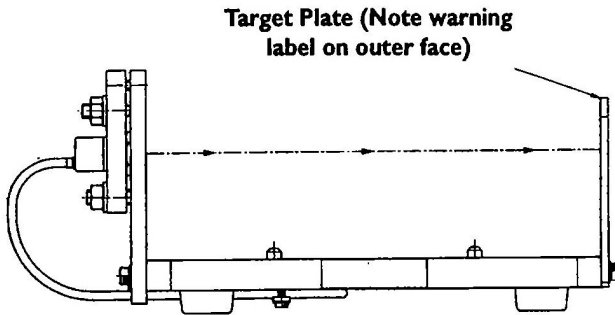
Side view of Laser Alignment Accessory. (Beam passing from left to right in this view)
